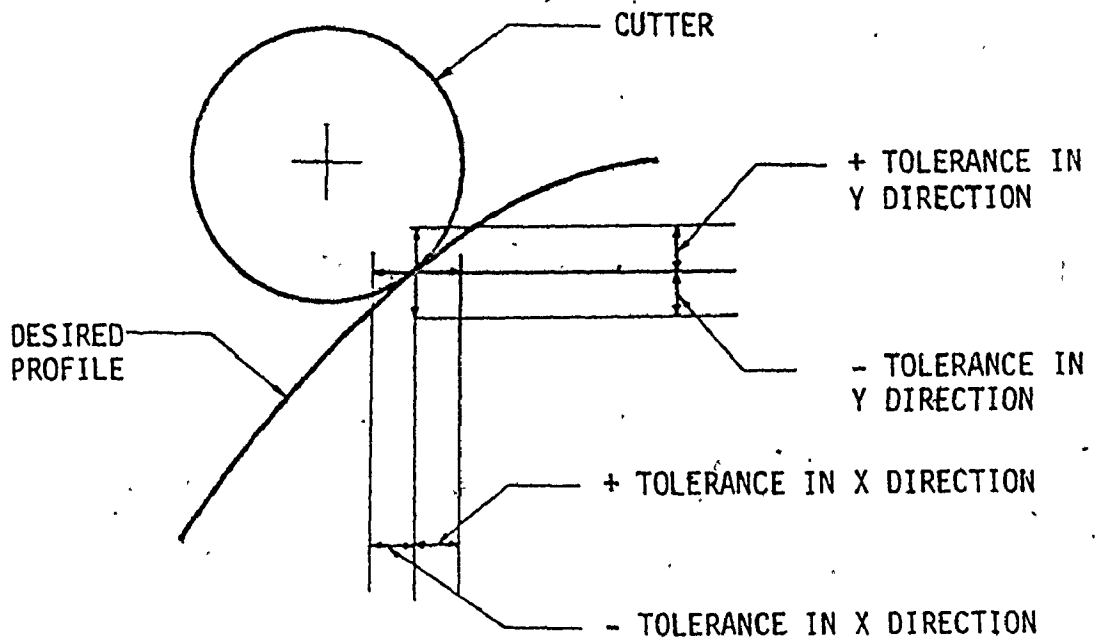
Two Dimensional Tolerance Band for Setting Cutter
